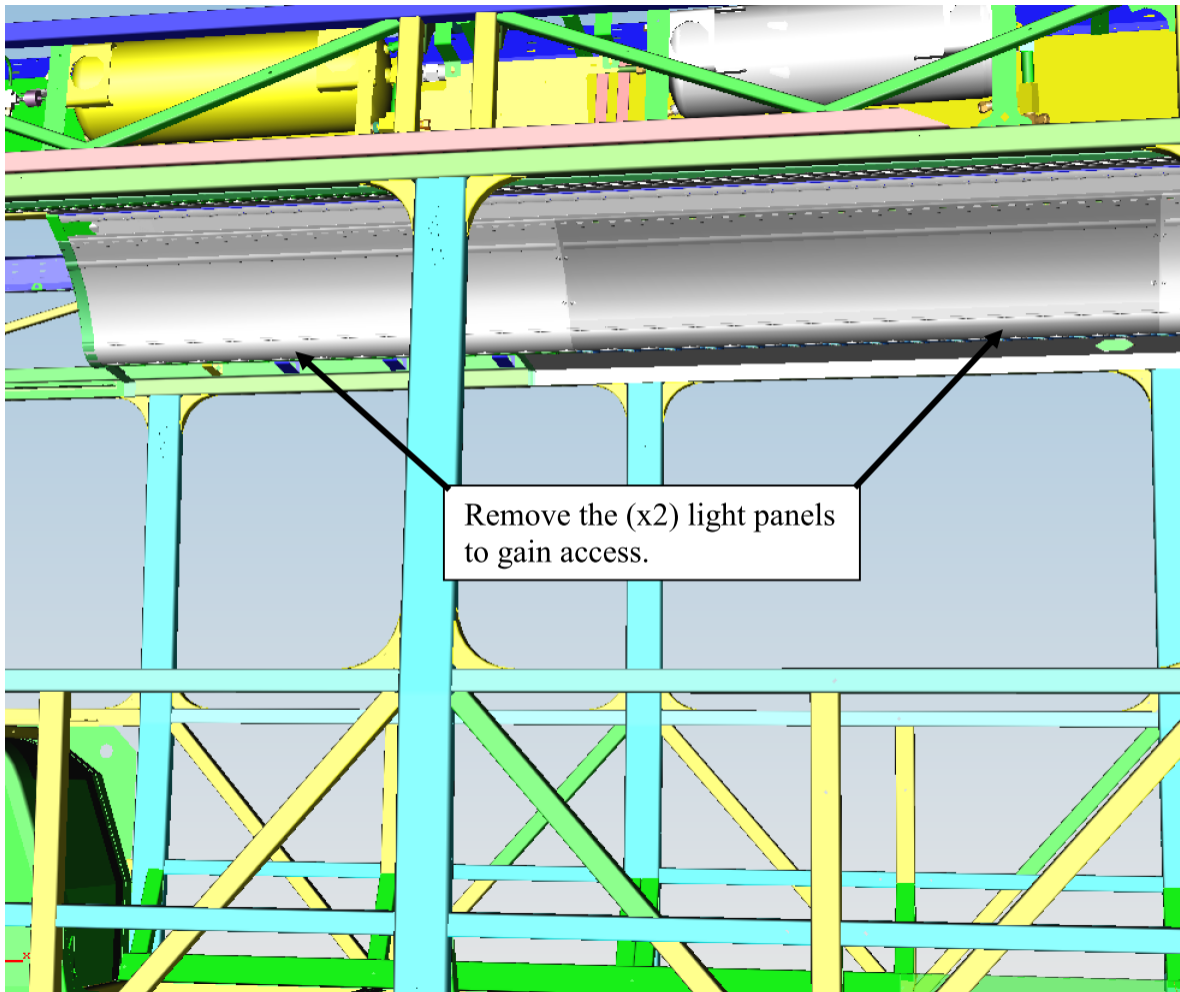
SHOWN LOCATION ON CURBSIDE TO REMOVE LIGHT PANELS (X2)
